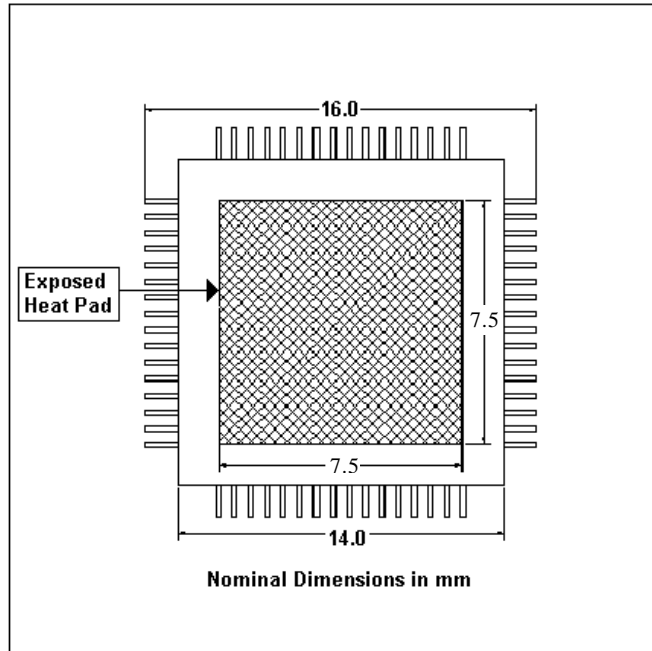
Bottom View of Thermally Enhanced 100-pin TQFP Package
